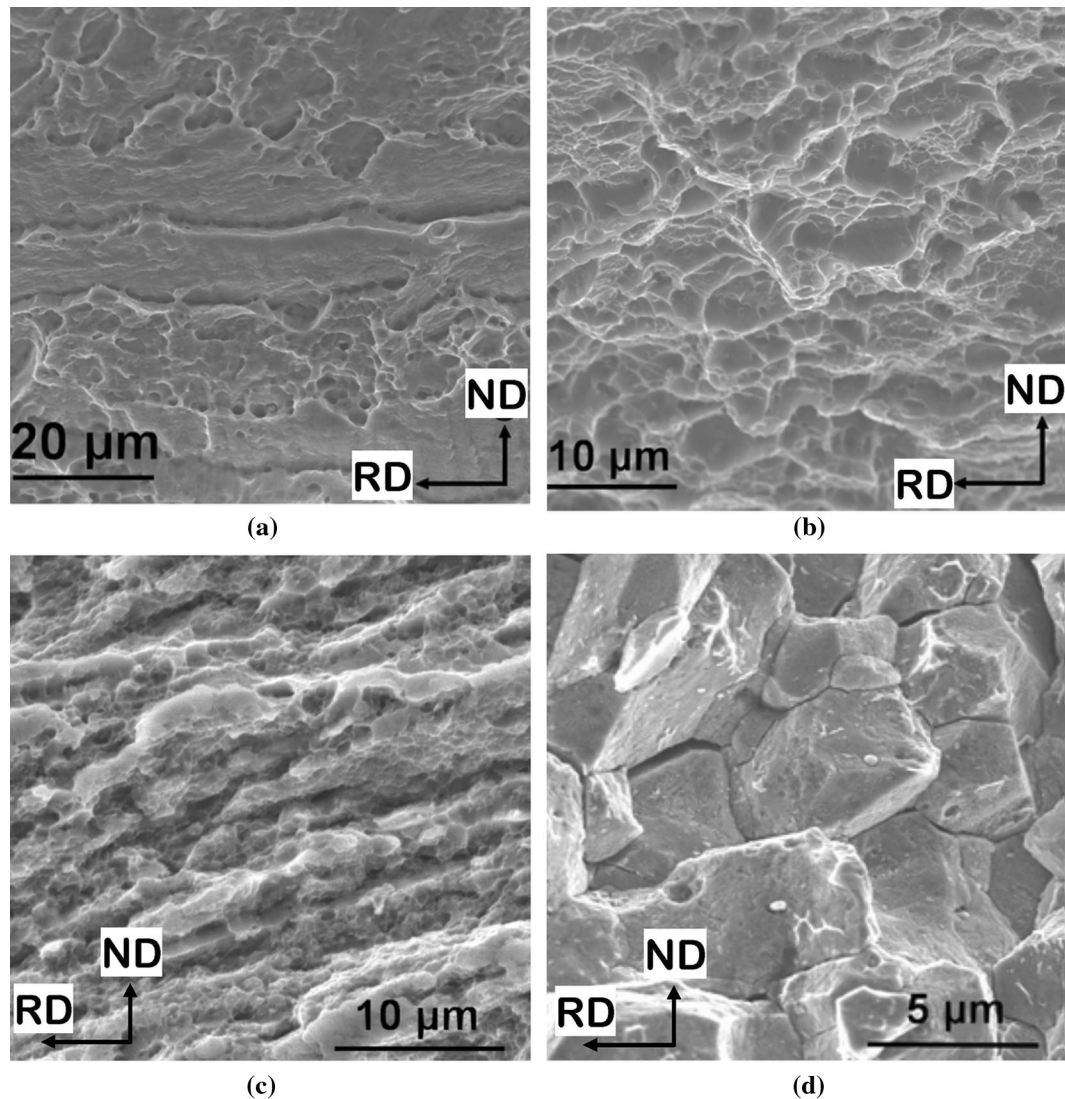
Typical fracture surfaces of cross-weld specimens. (a) Mixed dimpled/fibrous fracture (TMAZ); (b) dimpled fracture of small, equiaxed grains in the nugget; (c) ductile (submicrometer-dimpled) fracture along the KB; (d) intergranular fracture along “sensitive GBs” of a Gap0.7 specimen.
